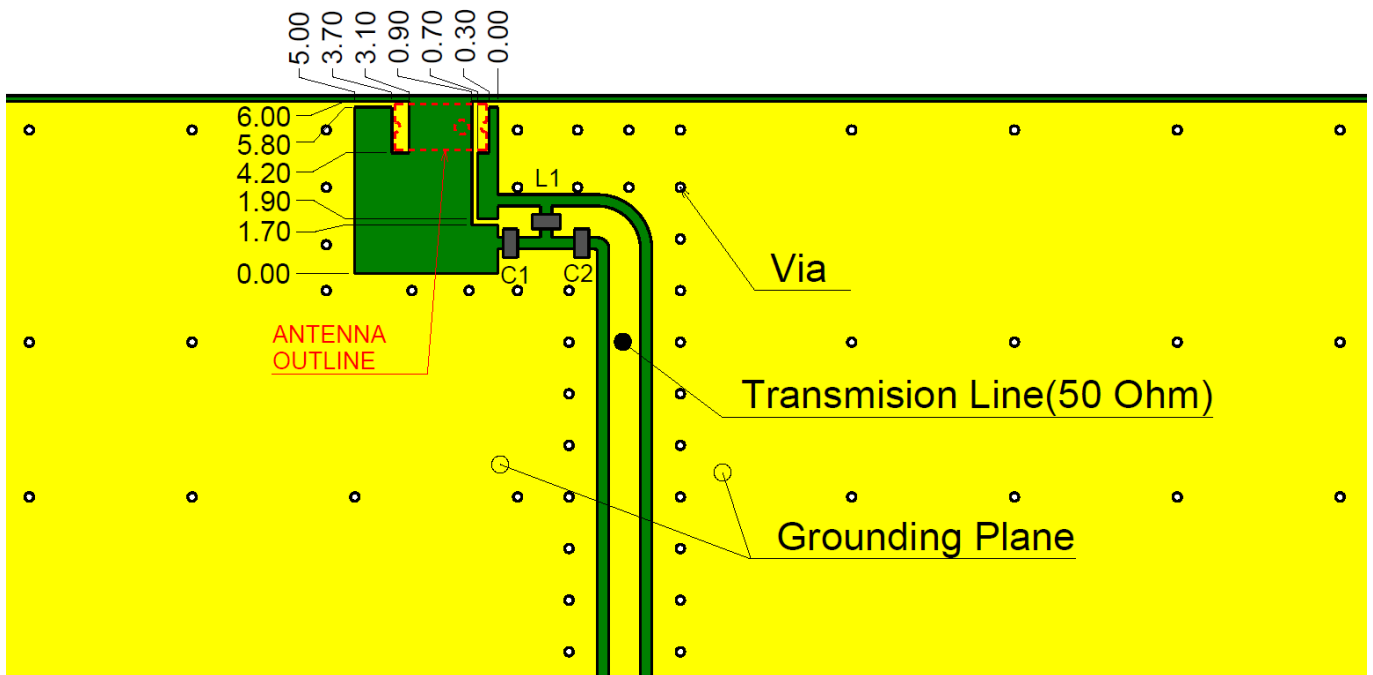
Recommended mirrored PCB Layout of Config A
